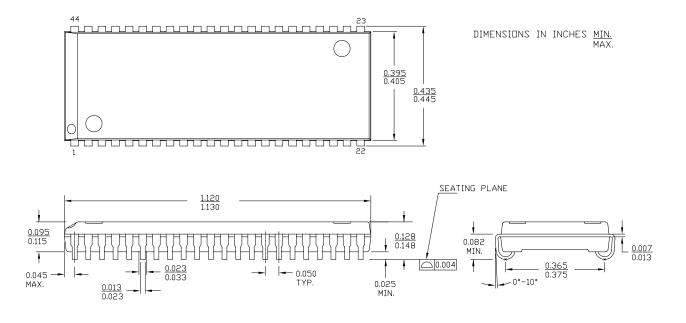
44-pin (400-Mil) Molded SOJ, 51-85082
